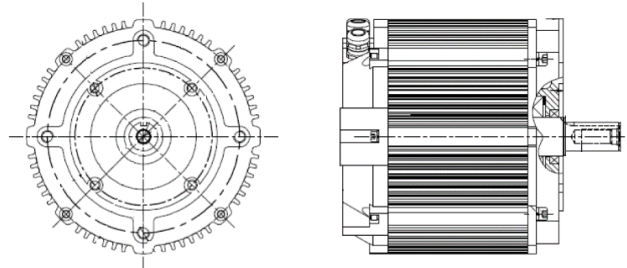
BLDC electric motor for drive of a guide roller with a 6 kW and 3200 rpm
